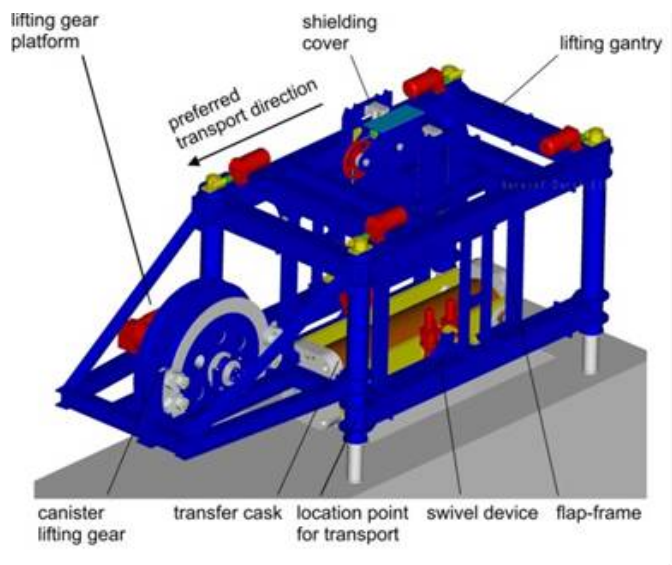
Design and fabrication of an emplacement device for BSK 3 canister
